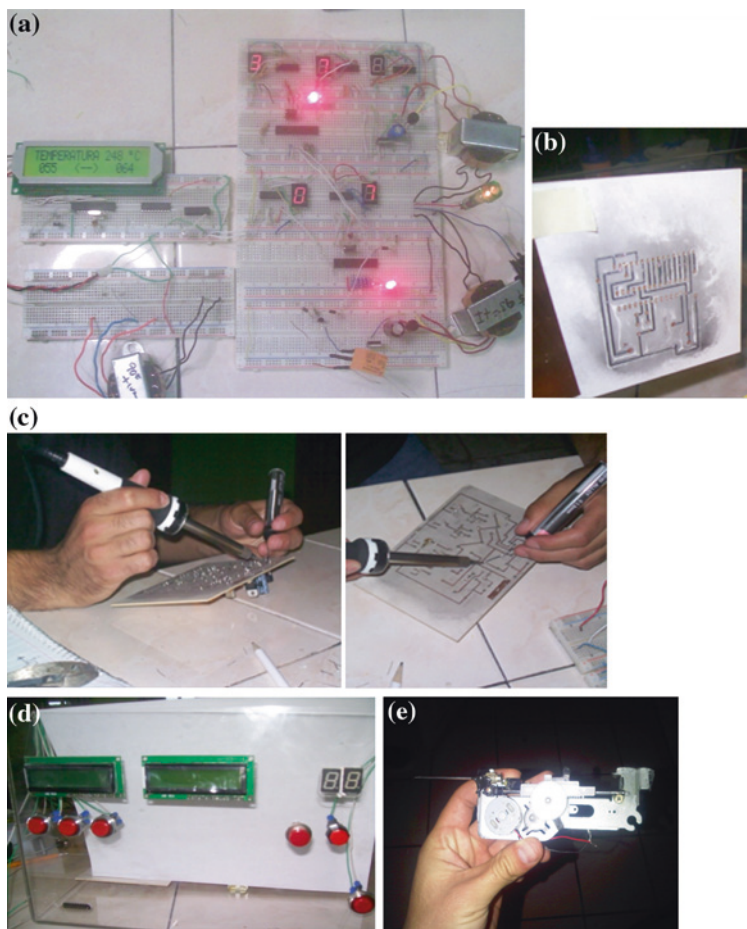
Electronic design and analysis of shape memory material: (a) the temperature controller circuit, (b) printed circuit board, (c) solder components, (d) full box (Push button, indicators, LCD displays, switch and connection to electrodes) and (e) terminals and box components (terminal stripping of liver tumors: shortest amount of time and high accuracy to improve security of the process)
